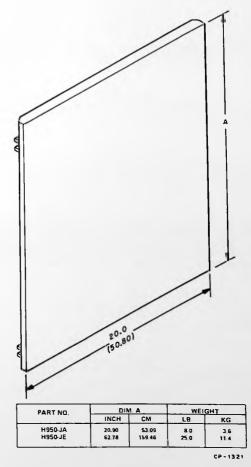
H950-JA and H950-JE Short Door Weight and Dimensions
